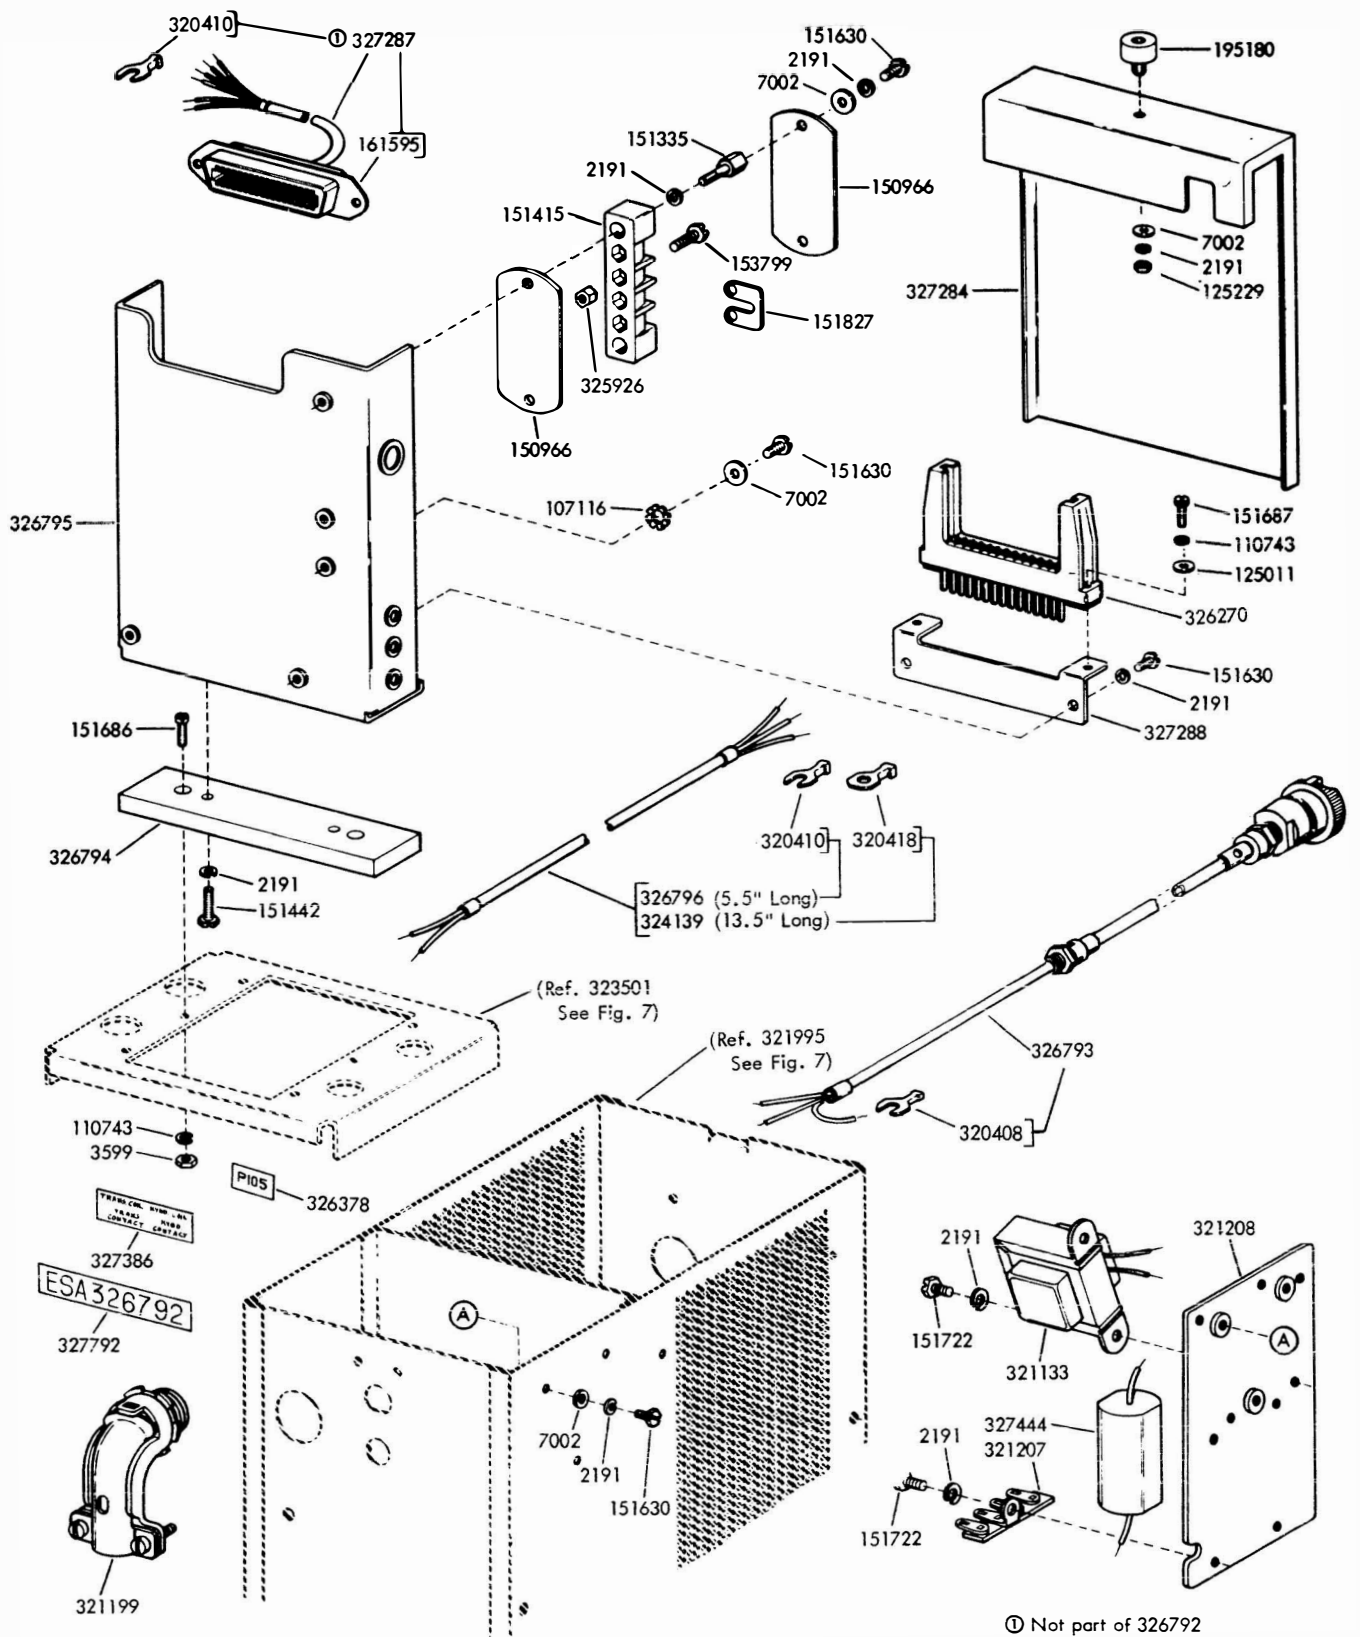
326792 ELECTRICAL SERVICE ASSEMBLY (Continued)
